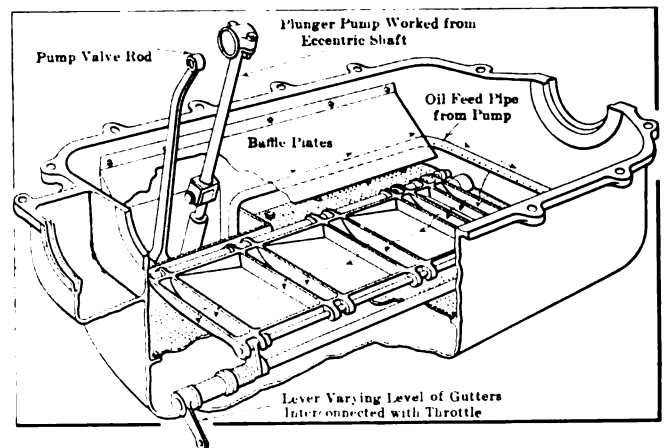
Sectional view of adjustable splash gutters in use on English Daimler cars. The pump rods and eccentric are also shown
